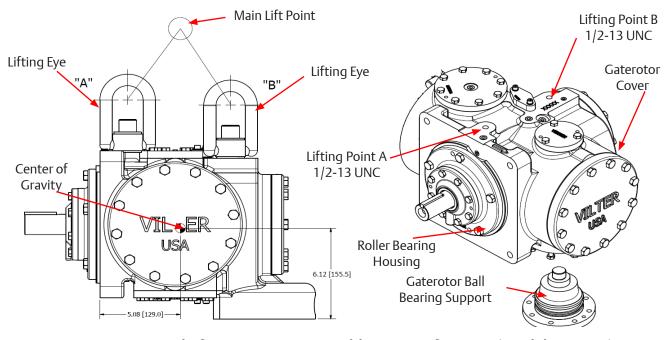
Bareshaft Compressor Assembly Center of Gravity (Models 97-127)
